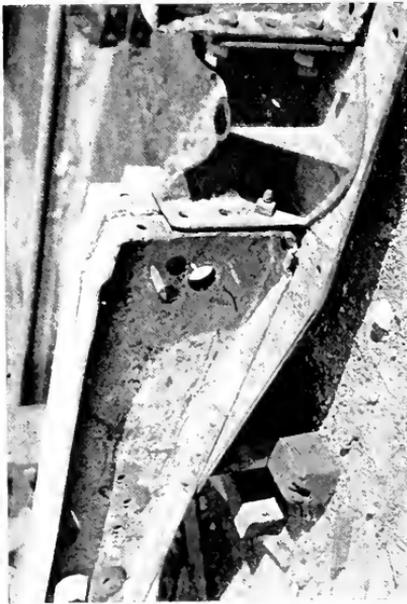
A View of the Body Bolster. This is the member which carries the entire load of the car at each end. Note the bottom cover plate was spot-welded to the flange of the diaphragms. The three in place for the purpose of holding in place a cast-iron side bearing.
